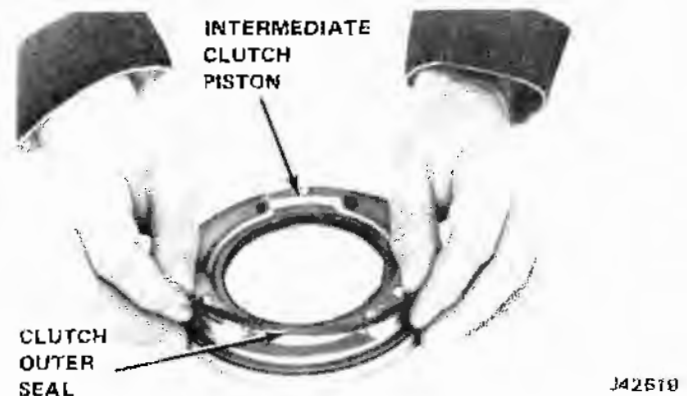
Installing Outer Seal on Intermediate Clutch Piston
